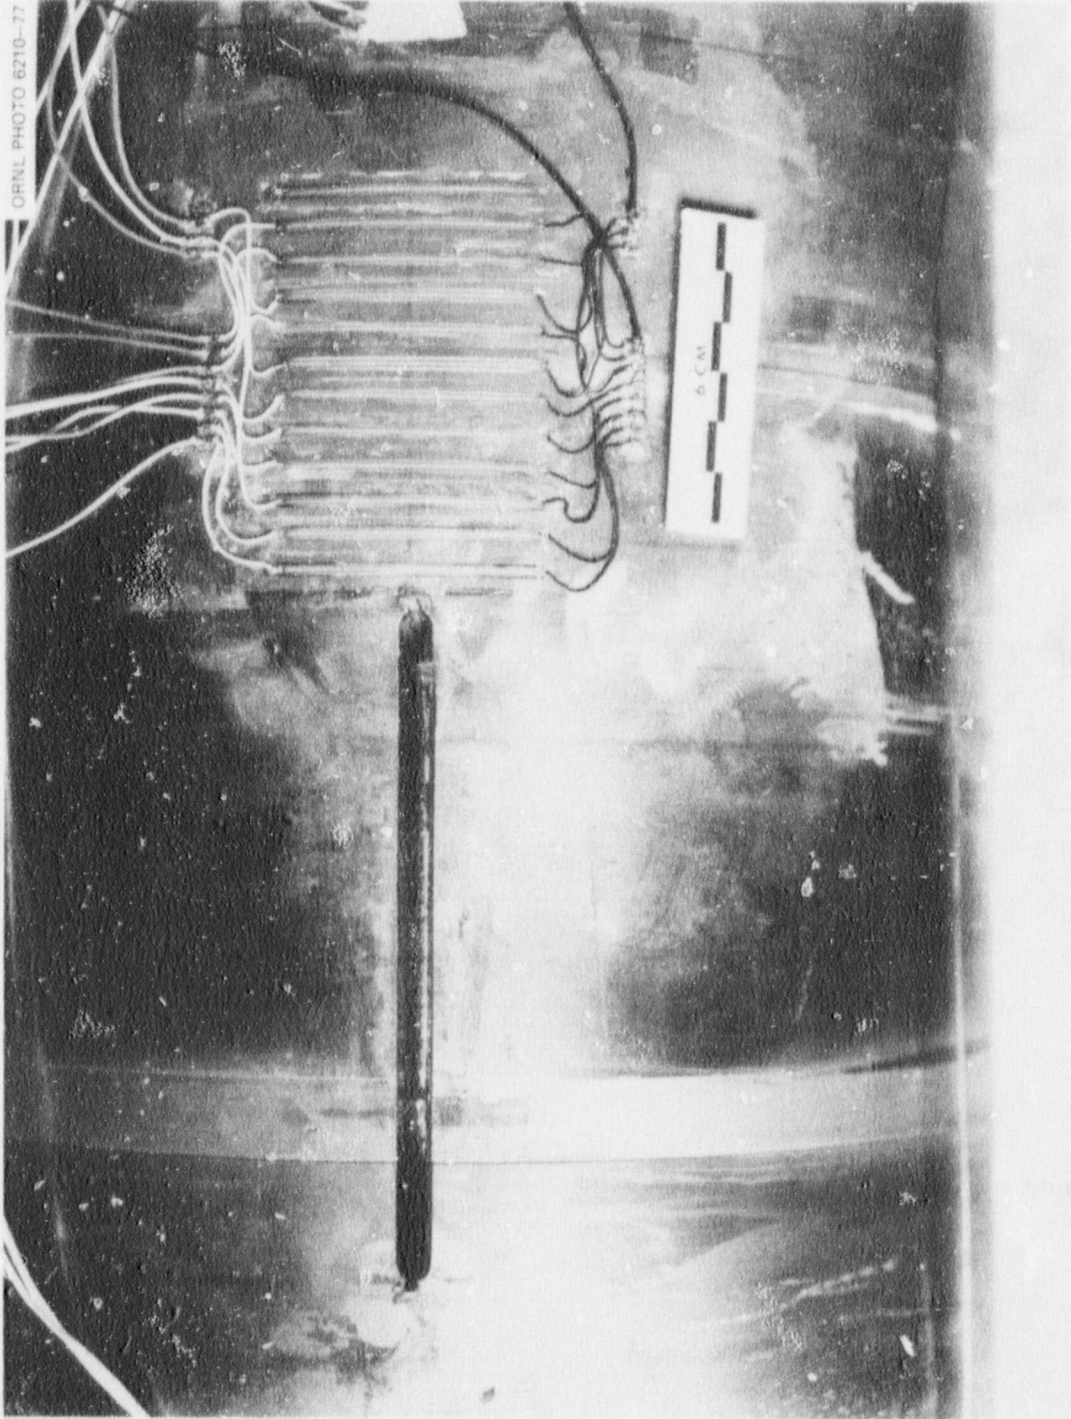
Close-up view of ladder gage used to monitor crack extension in models (1 cm = 0.394 in.).
